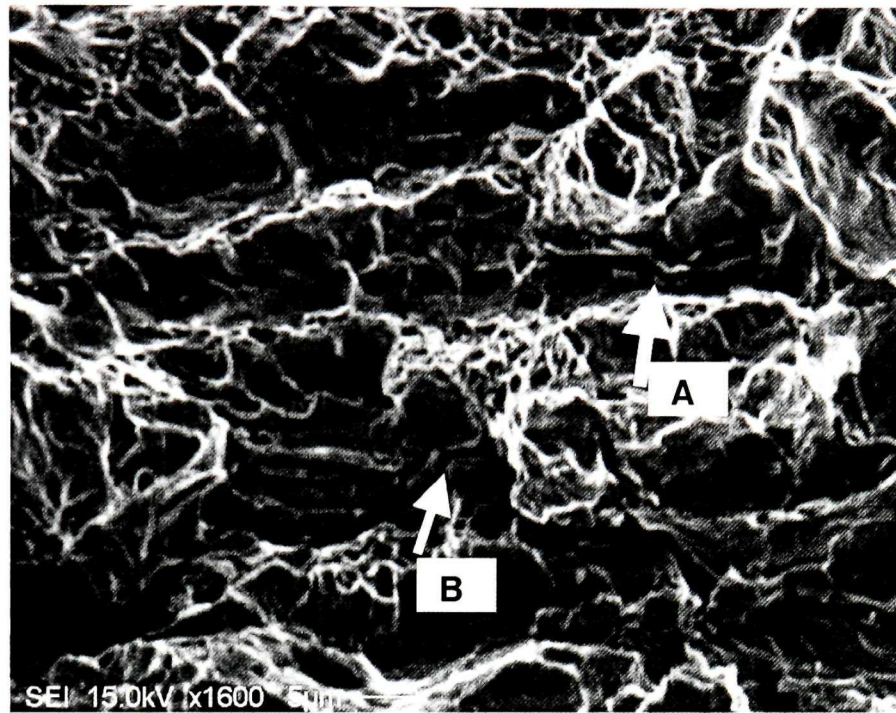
Dimples and inclusions on fracture surface of an HR material, x1600
